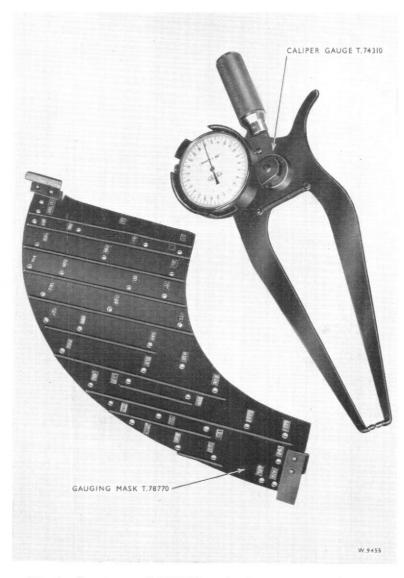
Gauging mask T.78770, and caliper gauge T.74310 for checking thickness of impeller vanes.
